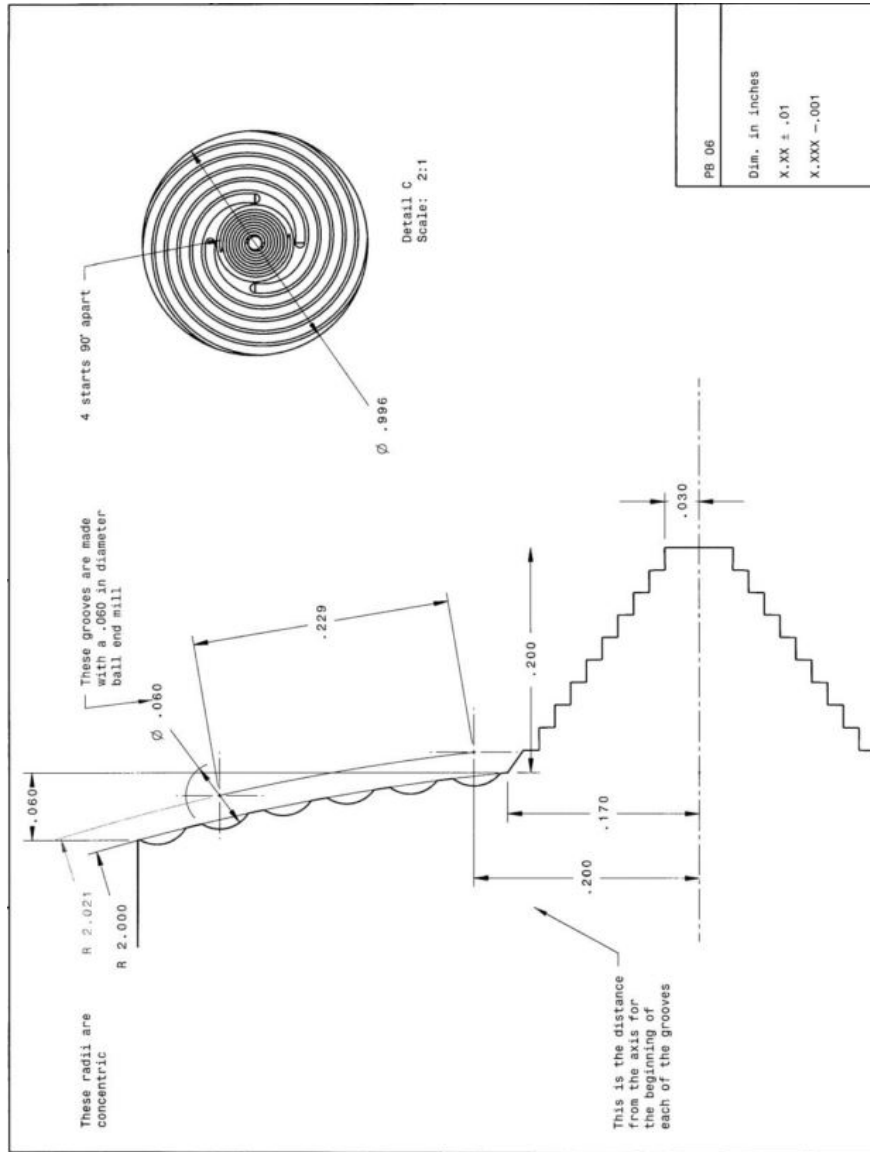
CS4 tool geometry. Used for welding 7075 Aluminum.
